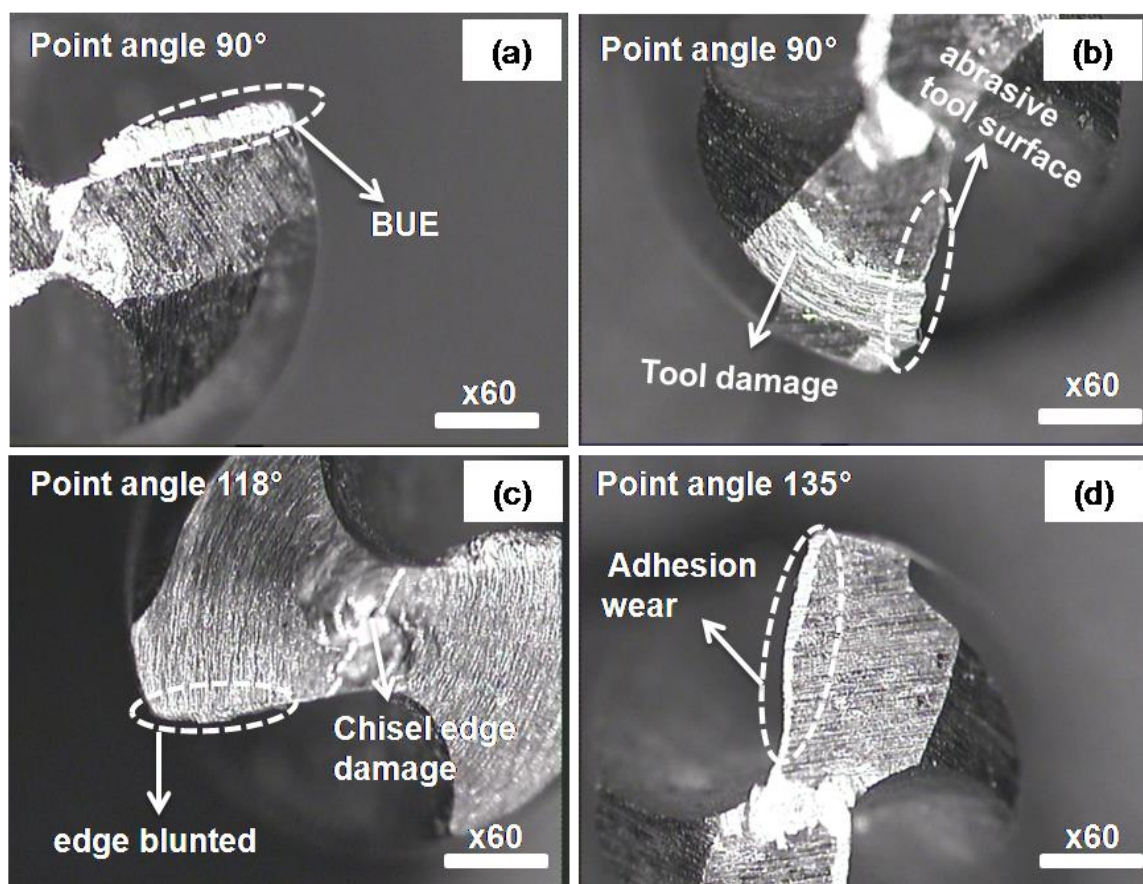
13 Optical images of the cutting tool: (a) build-up edge (BUE) on the flank face (point angle 90°), (b) tool damage and abrasive wear (point angle 90°), (c) blunted edge in point angle 118° , and (d) adhesion wear in point angle 135° .
